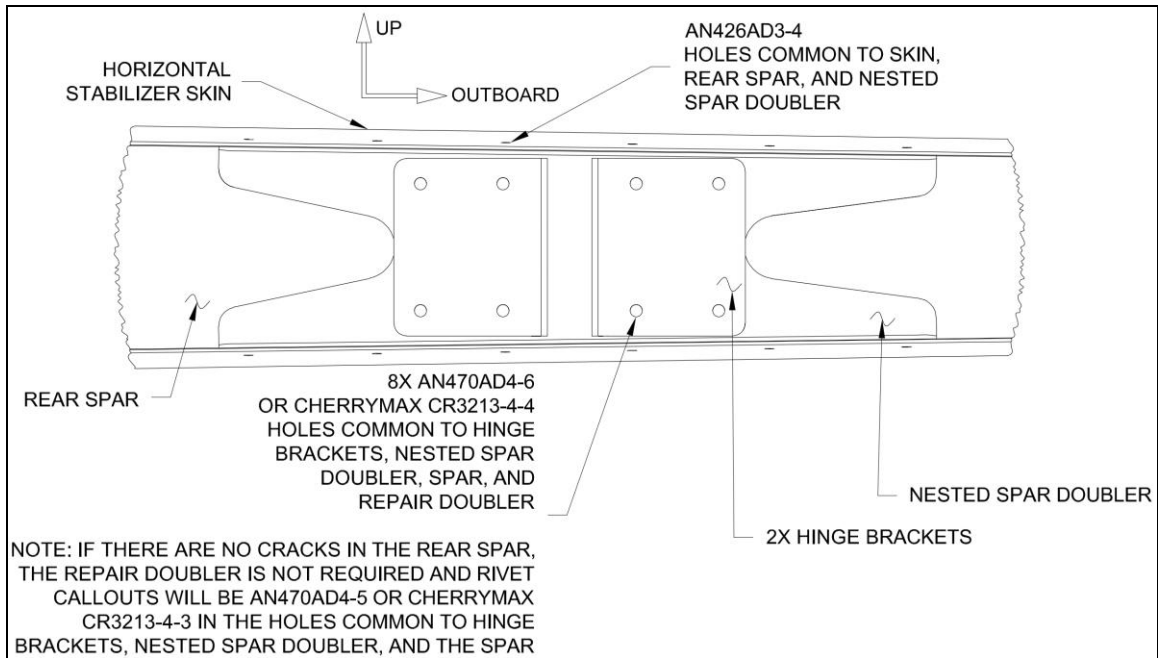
RIVET CALLOUTS AND REAR SPAR AFT VIEW
